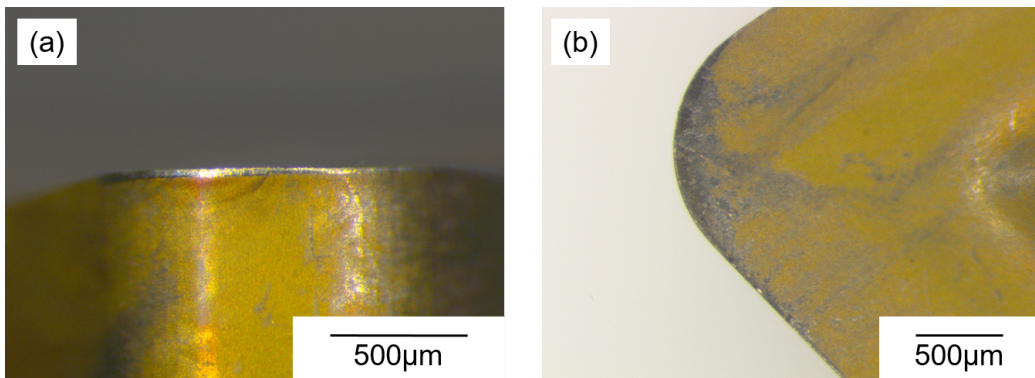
Example tool wear produced during face turning of face 2 on billet 3.1. The tool shown was used during the 1st repeat of face 2. The tool shown is representative of all passes performed on face 2.
